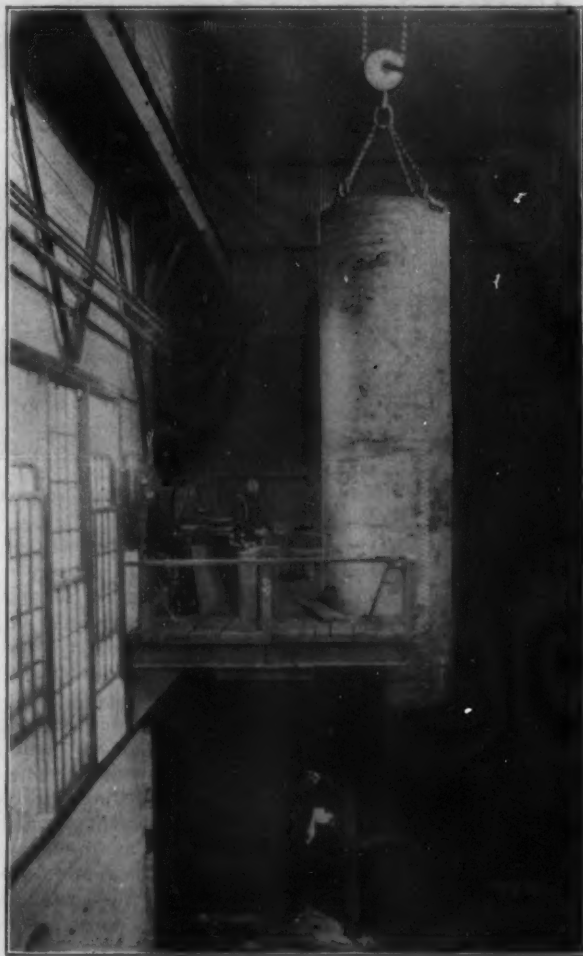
Riveting a 30-Ft. Section of Pipe.
